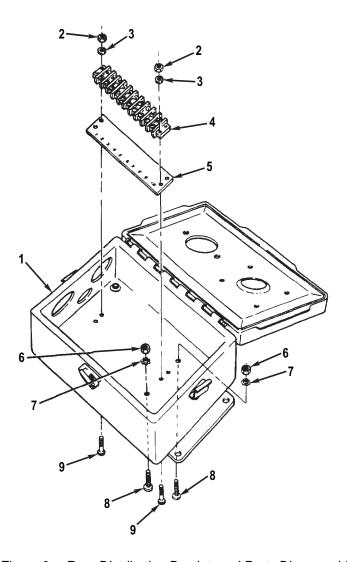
Rear Distribution Box Internal Parts Disassembly.
